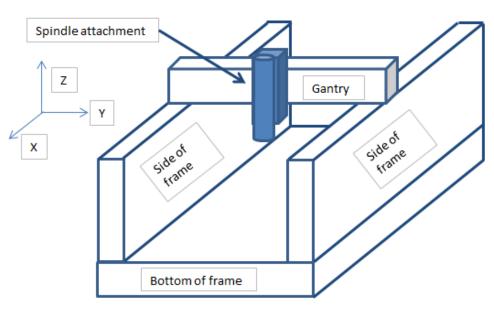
Basic representation of the CNC milling machine (gantry is simply supported and the frame sides are cantilever beams).
